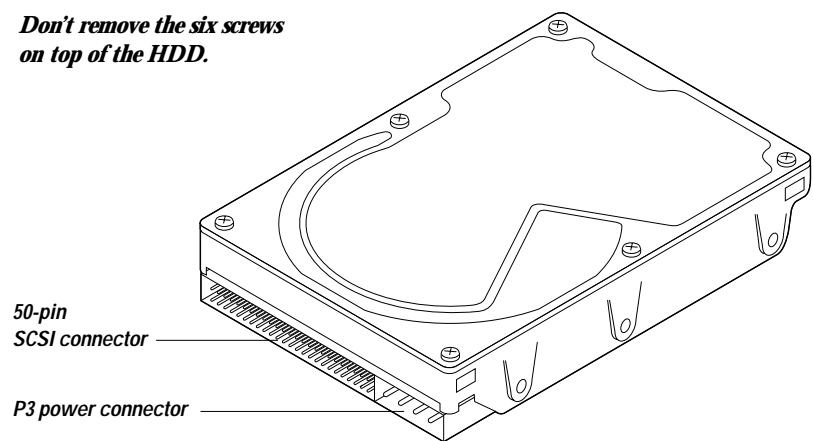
Fiery XJ BP100 hard disk drive, removed
